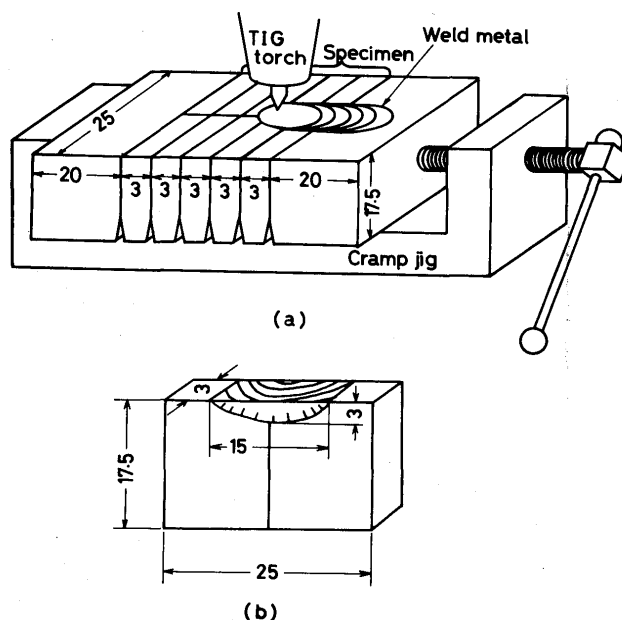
Illustration of (a) welding procedure and (b) test specimen
